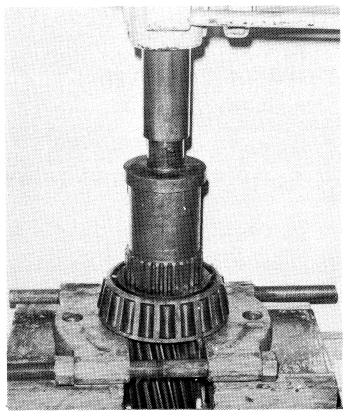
Removing Roller Bearing Inner Race from Input Pinion.
